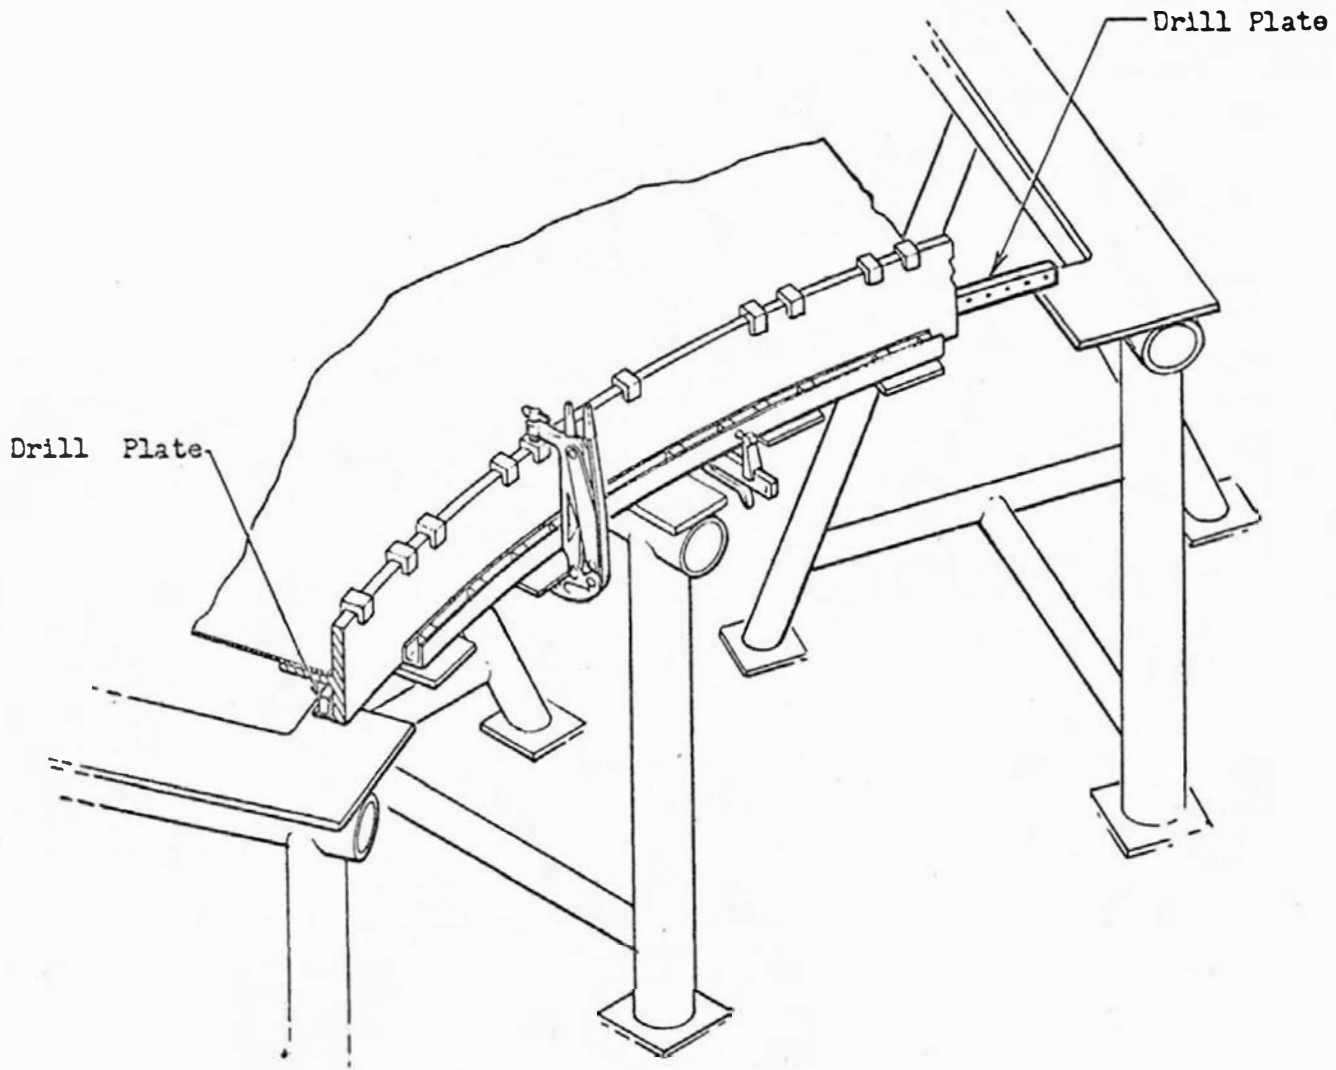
4. Base Heatshield Structure Assembly Fixture
